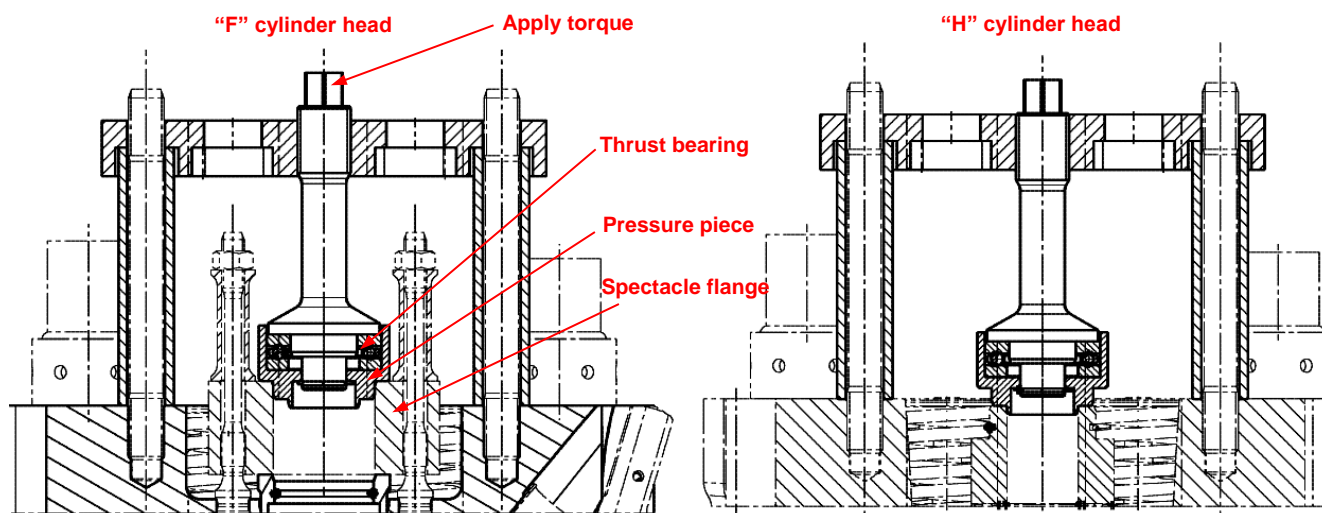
Positioning of the pressure piece on the spectacle flange, "F" and "H" cylinder head
